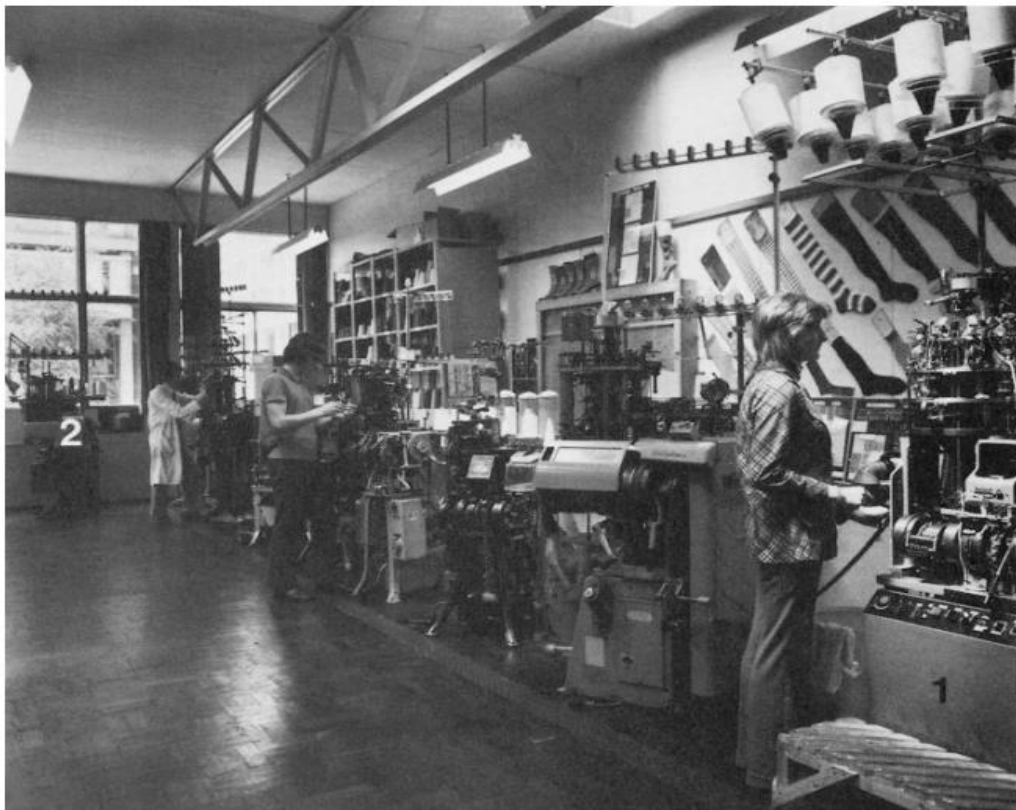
Mechanically controlled hosiery machines. 1 = seamless hose machine; 2 = double cylinder half-hose machine.
